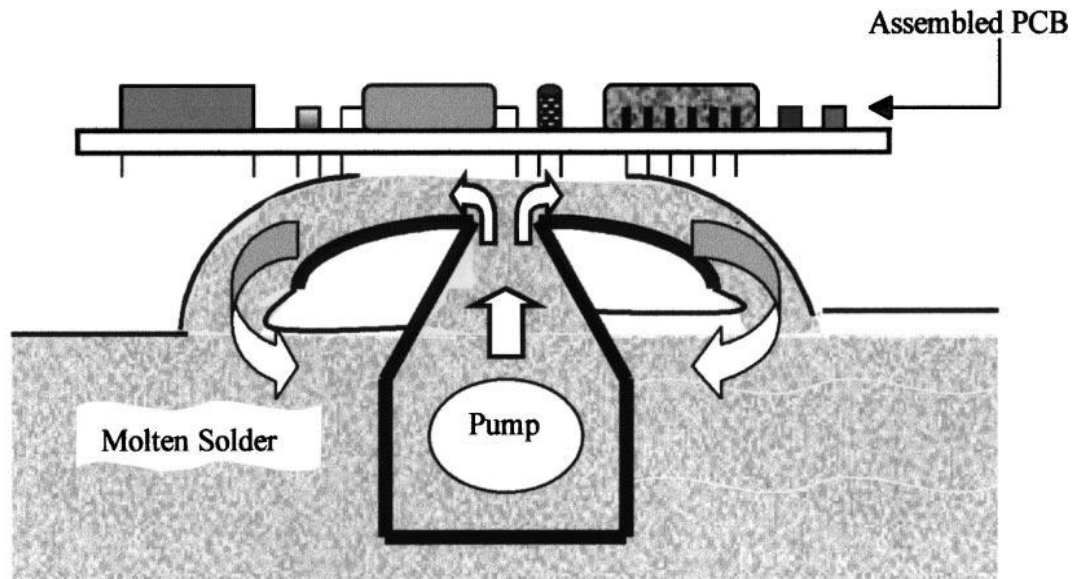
Wave soldering of a PCB (Abtew and Selvaduray 2000)
